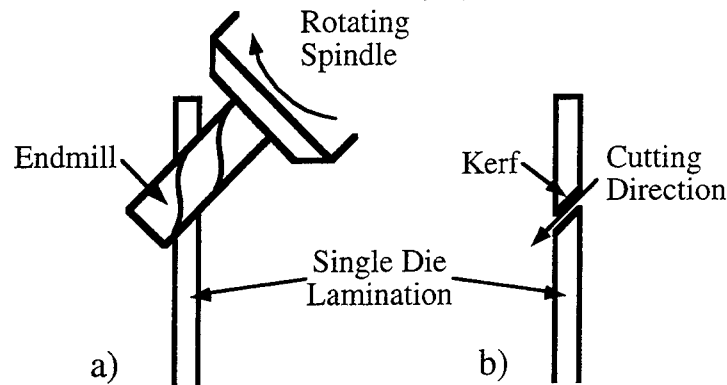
Cutting bevels into die laminations by a) flute-edge endmilling and b) by unconventional machining methods.
